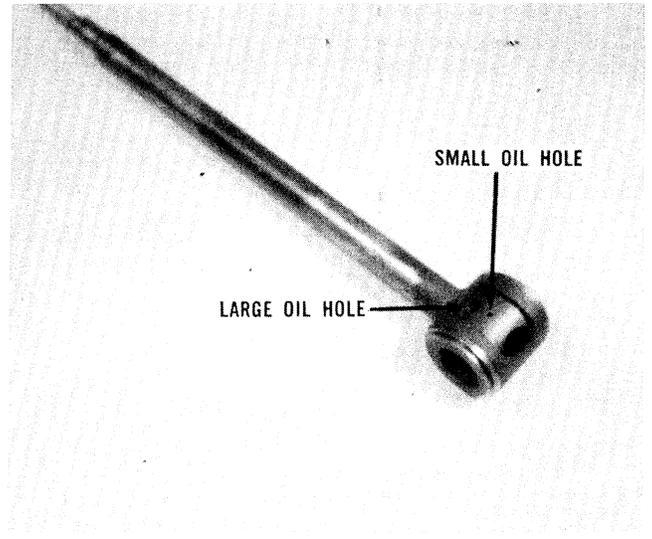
Position of Oil Holes in Pulsator Trunnion for Installation
